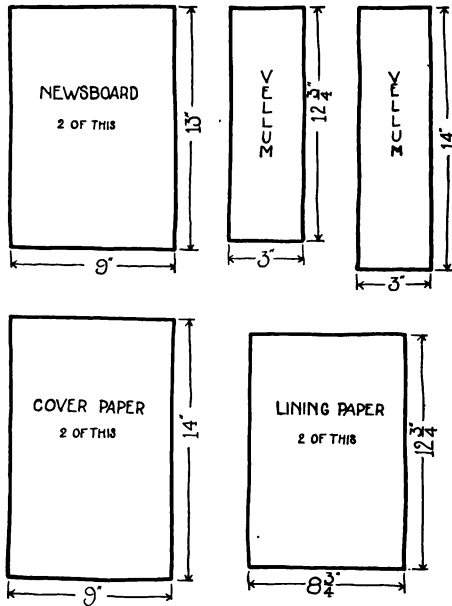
PLATE XXXVI. Dimensioned sketches of the parts of a portfolio.
